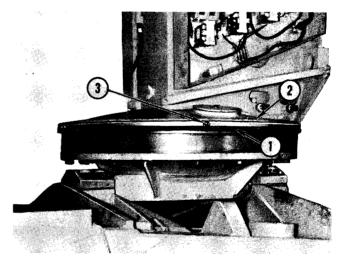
DUST SEAL 1. Extrusion 2. Flange 3. Clamp
